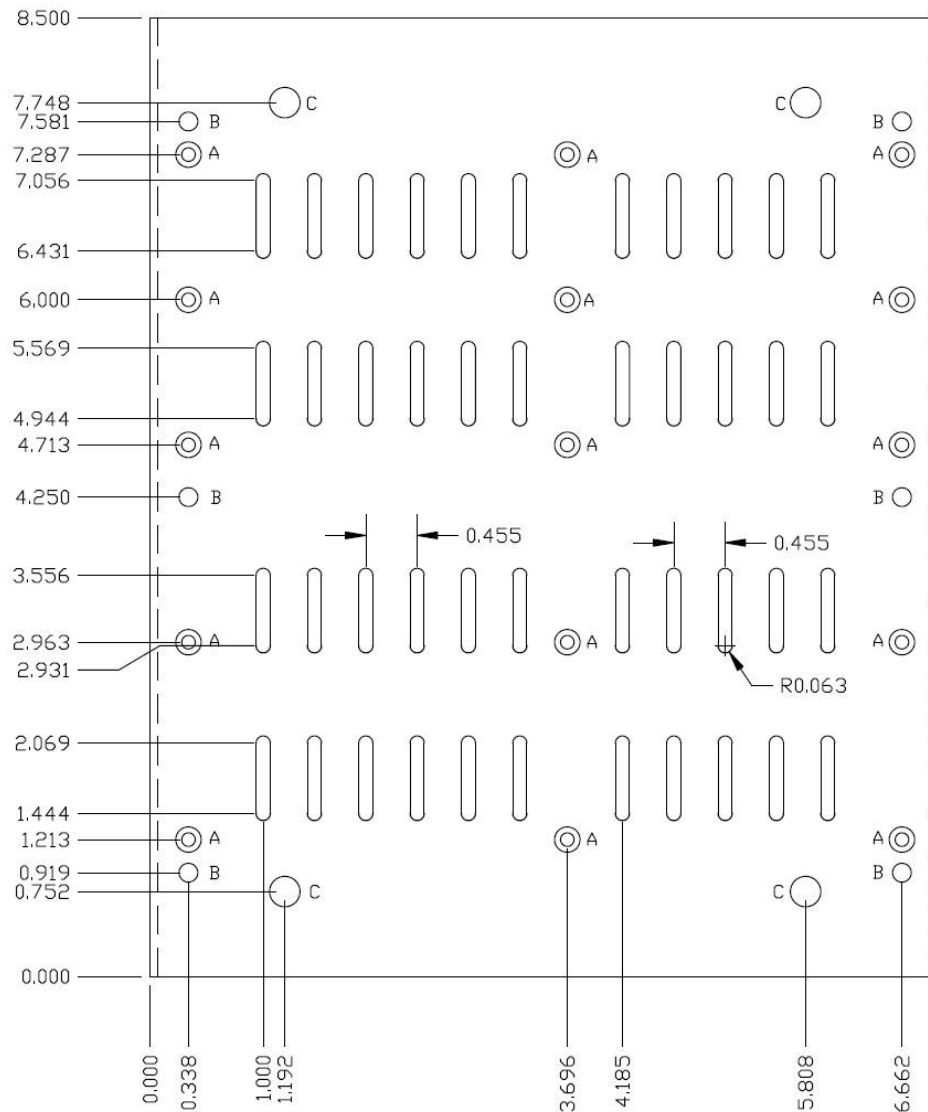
Dimensions and mounting of P620 Enclosure, bottom view
